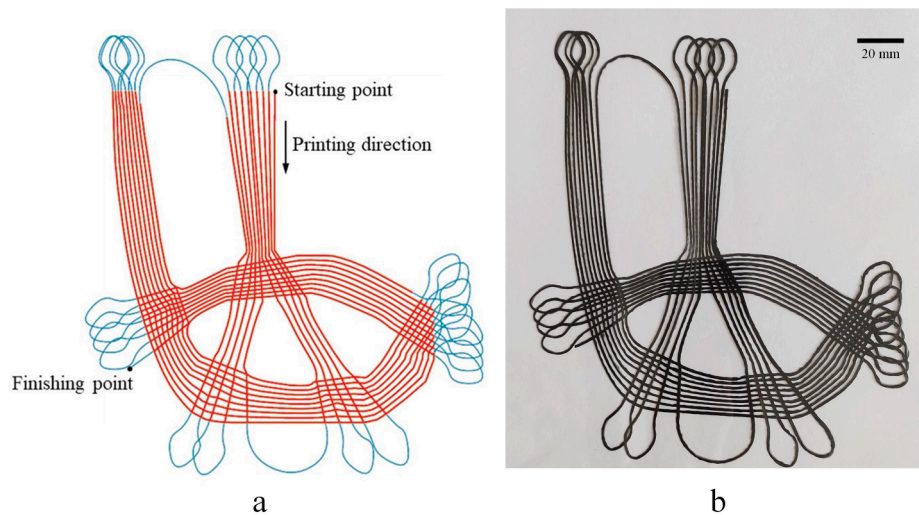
(a) LPP generated printing paths of topology optimized L-shape part; (b) printed L-shape part with continuous carbon fiber reinforced polyamide filaments.
